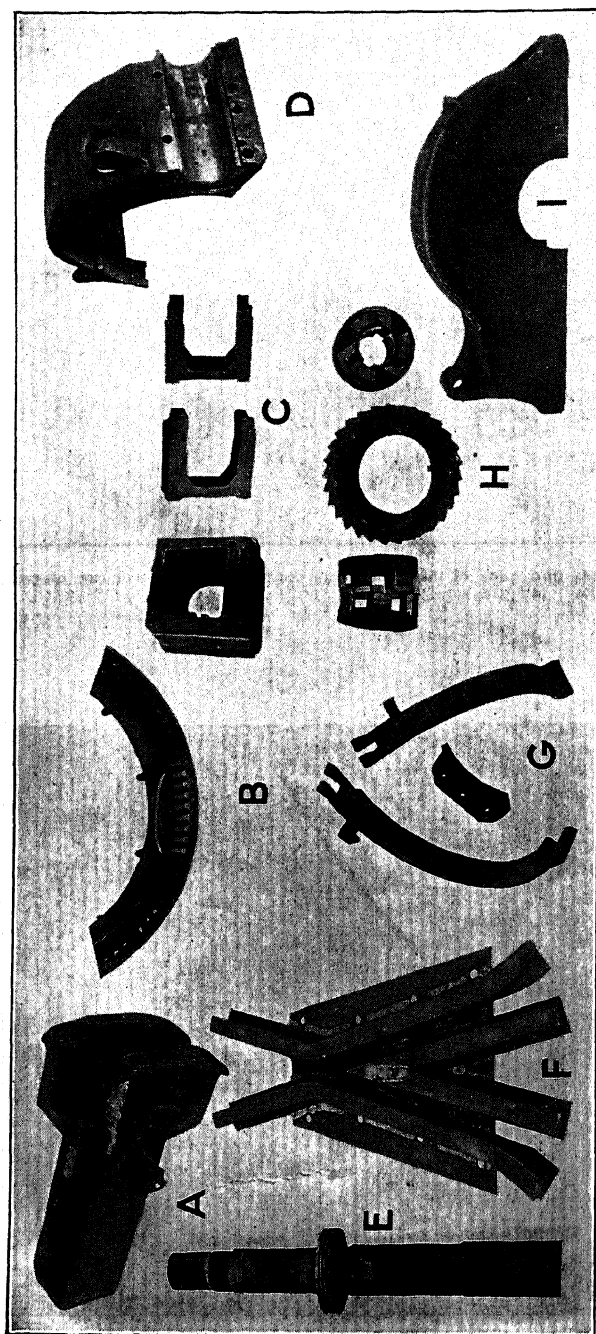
Group of parts reclaimed by arc welding. (A) Steel bumper for mine car fabricated and hard-surfaced at wearing faces. (B) Ring gear with teeth replaced by weld metal and case hardened. (C) Journal boxes for 13-ton locomotive (left) and 7-ton locomotive (center and right) reclaimed for only \$8.17 and \$5.51 respectively. (D) Gear case for mine locomotive with bearings and end bell built up and faced with mild steel weld metal. (E) Axle for mine car with threads rebuilt by applying weld metal and machining the threads. (F) Railway frog repaired at a saving of 50% by arc welding. (G) Steel brake band (right) made by welding for 75 cents and wooden band (left) which the steel band replaced. In center is an arc welded steel brake shoe made for 35 cents. (H) Clutch (left) for coal cutting machine with teeth lengthened by building up with weld metal and grinding to size. Clutch (right) has been built up by welding and then case hardened. In center is a bronze bevel gear for cutting machine with lugs on inside built up and case hardened. (I) Cast steel gear case for locomotive reclaimed for \$2.50 by arc welding in a new steel side plate.
